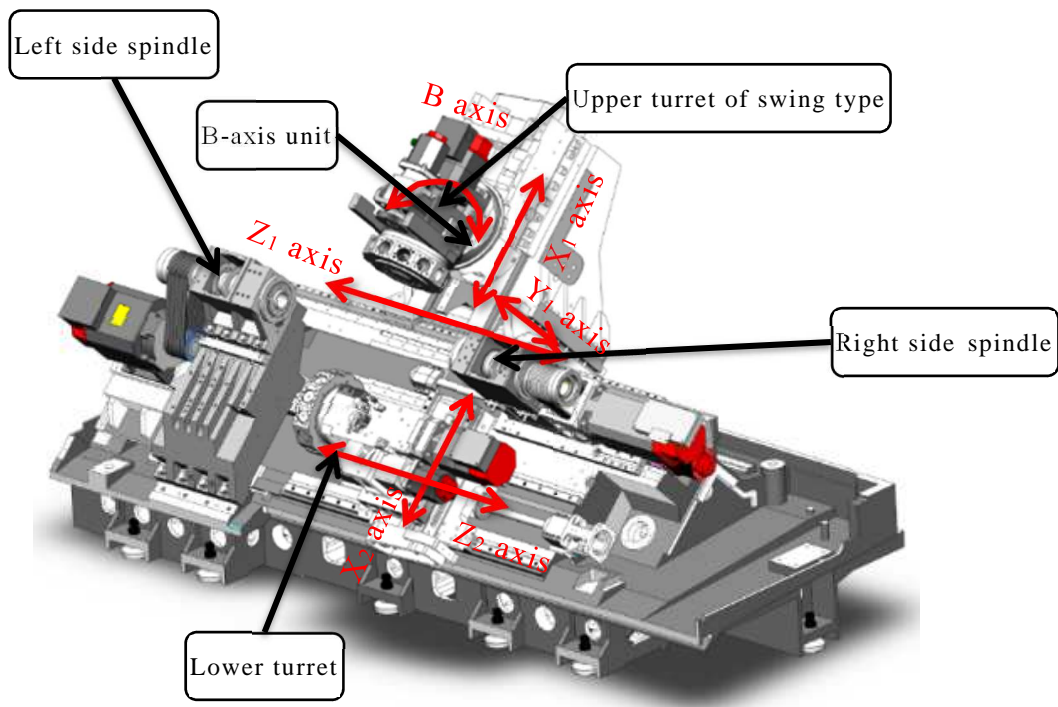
Multi-axis machine with B-axis rotary turret (Super NTJ)
